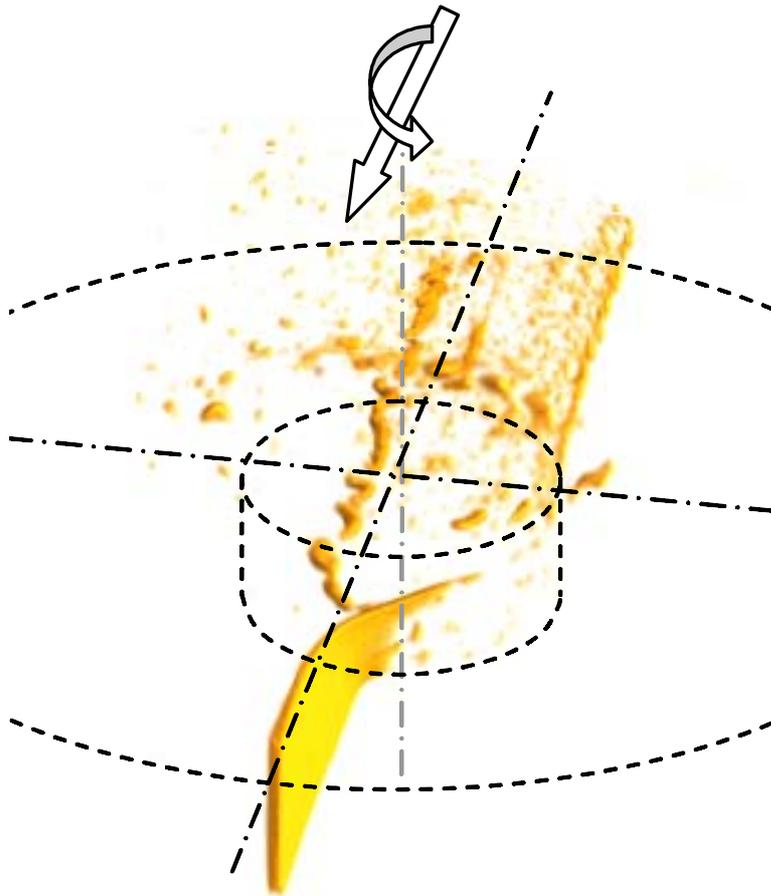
The tomographic model of weld in 2024-T3 to 2024-T3 (DMC-E1), highlighting only the copper marker material at the exit hole. The tool shoulder and probe positions are also illustrated.
